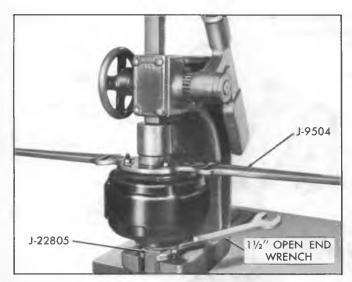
C--Holding and separating Fixture using Tools J-22805 and J-9504 in Arbor Press
